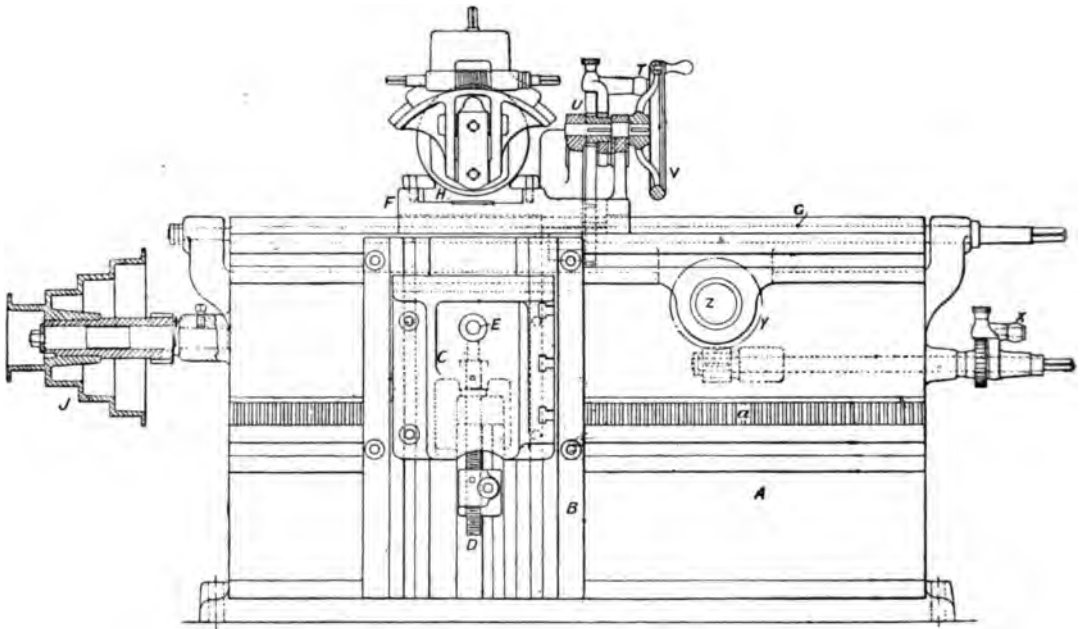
12-Inch Shaper. (Front Elevation.)
